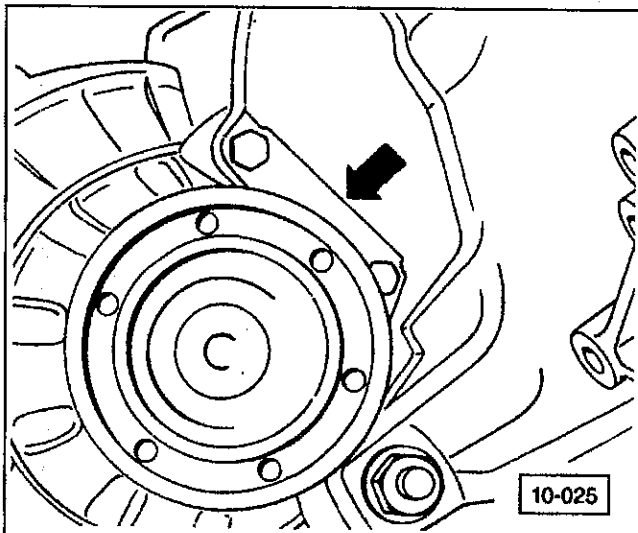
Cover plate (arrow) to be removed. 4-cylinder engine shown.
